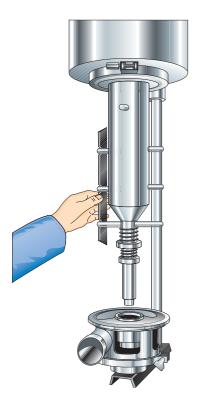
Removal of blades from the rotor assembly in lowered position.
